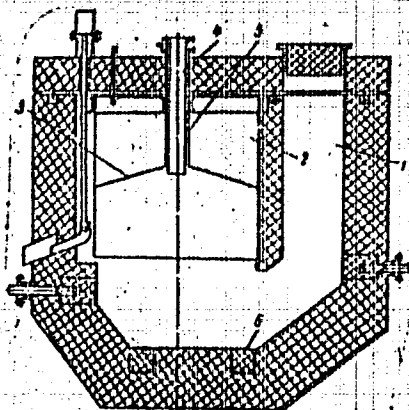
1- melting chamber; 2- mixer forehearth; 3- suspended metallic cap; 4- pipe for drawing off magnesium; 5- liquid seal; 6- auxiliary electrodes
